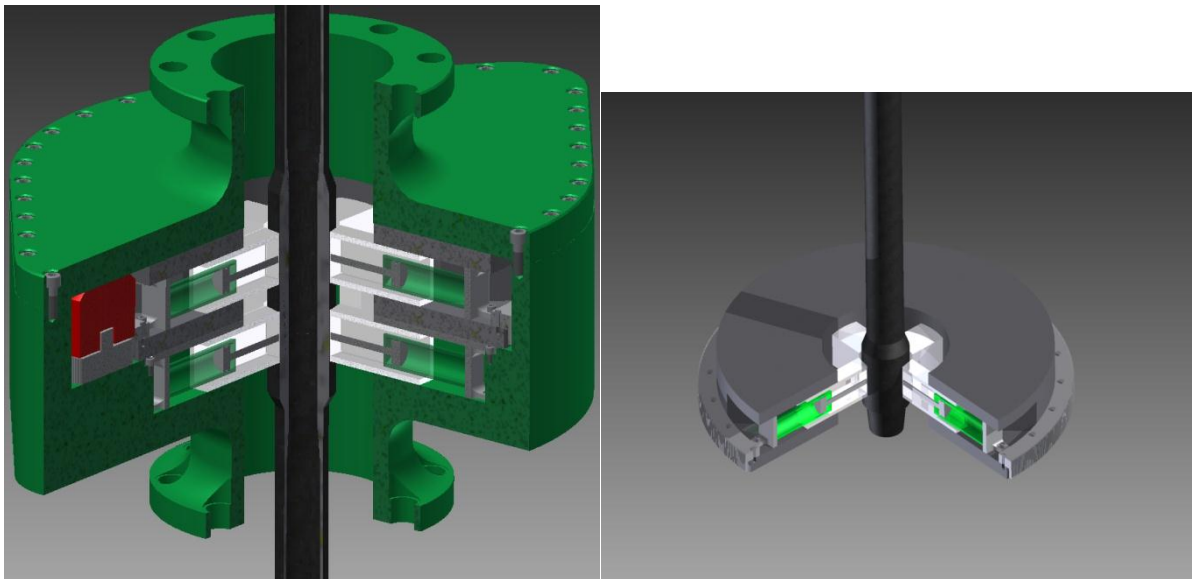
Cut away view of concept utilizing circular torque tool driven by hydraulic motors shown in red. Torque tool shown in right figure
